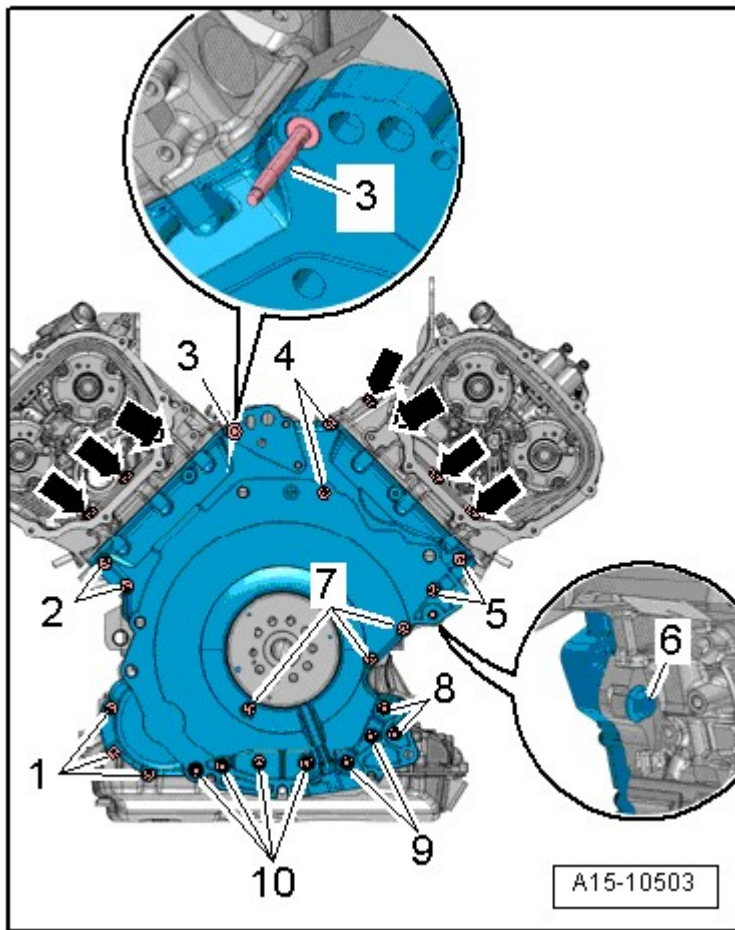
Lower Timing Chain Cover Bolt Tightening Sequence & Specification
